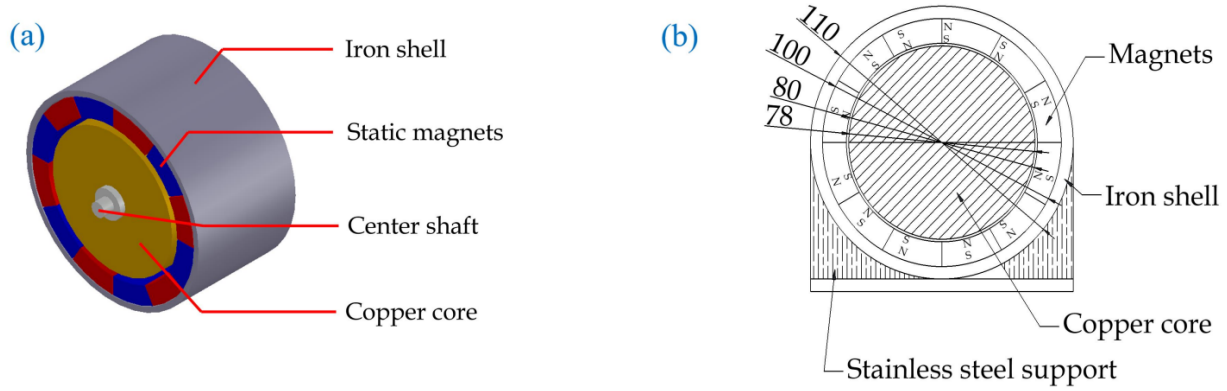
Configuration of ECD-A: (a) 3D view and (b) cross-section view
